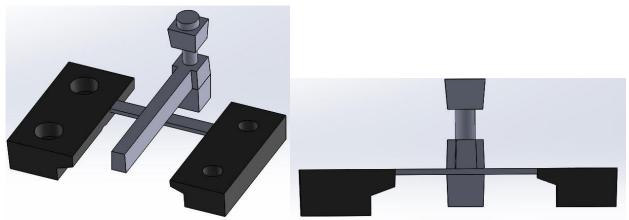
2nd alternative casting assembly in orthogonal and front views.
